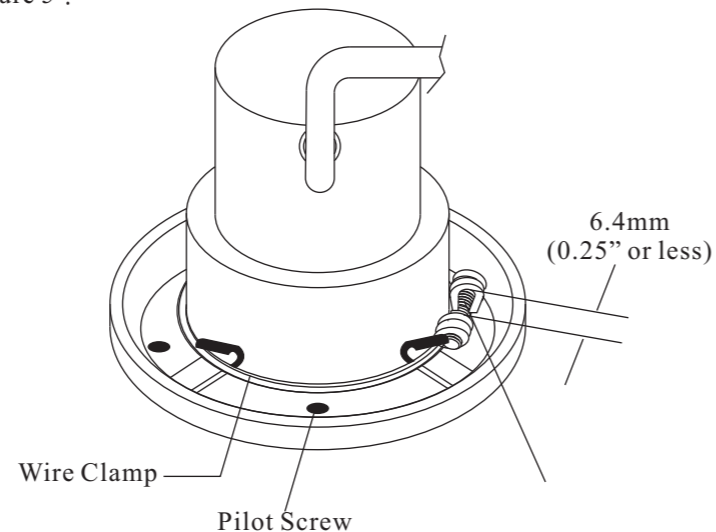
Tighten the bolt until the distance between the ends of the clamp equals 6.4mm (0.25") or less
